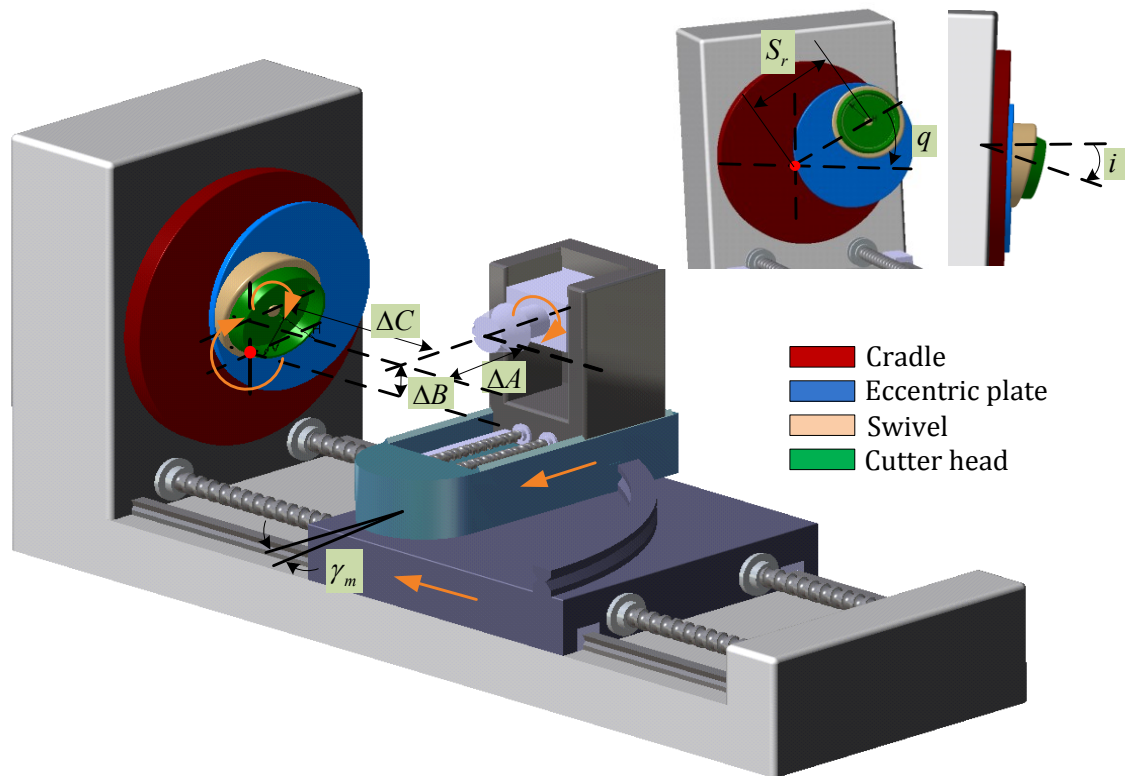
CNC machine for spiral bevel and hypoid gears.
